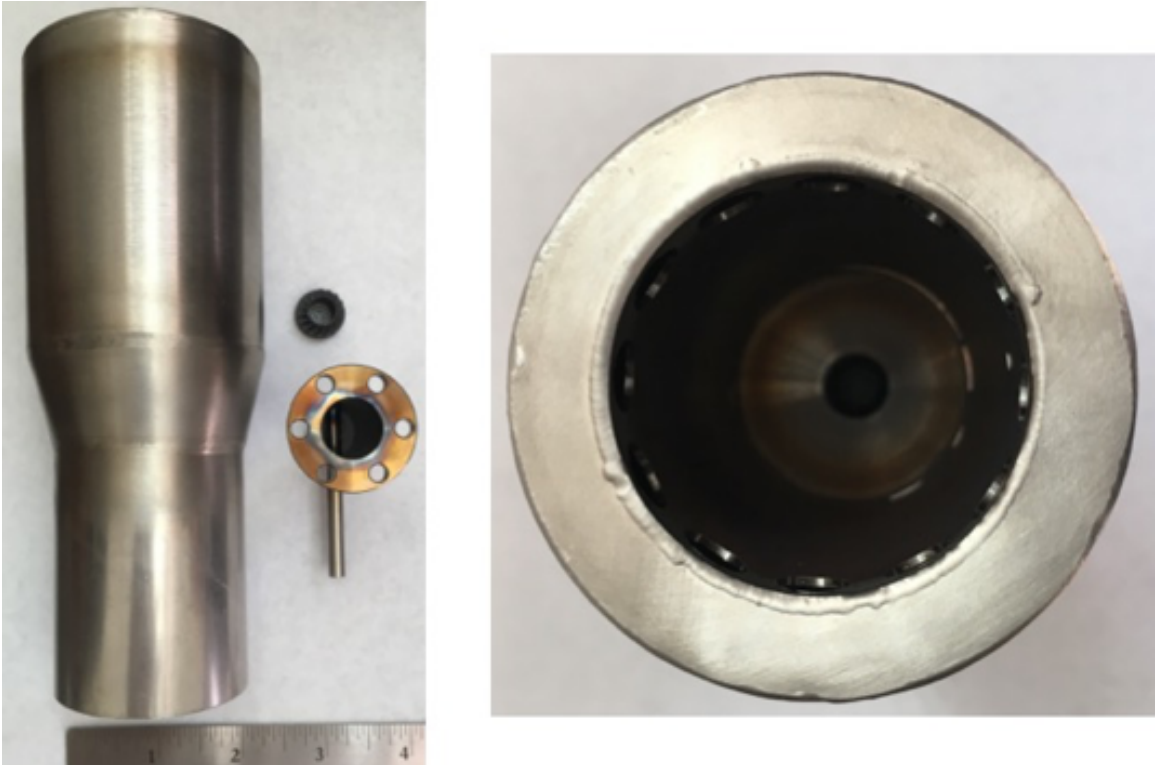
GENSETS fabricated combustor showing a side view (left) and a top view (right).
